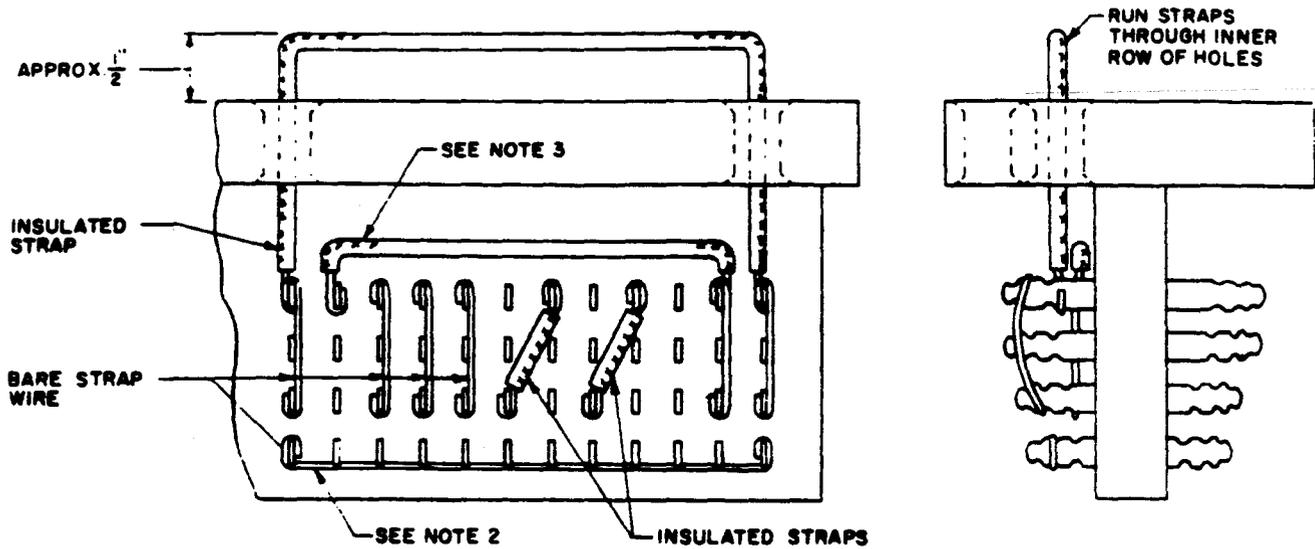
TYPICAL BASE AND NOTCH TYPE STRAPPING (PAR. 2.1811)
